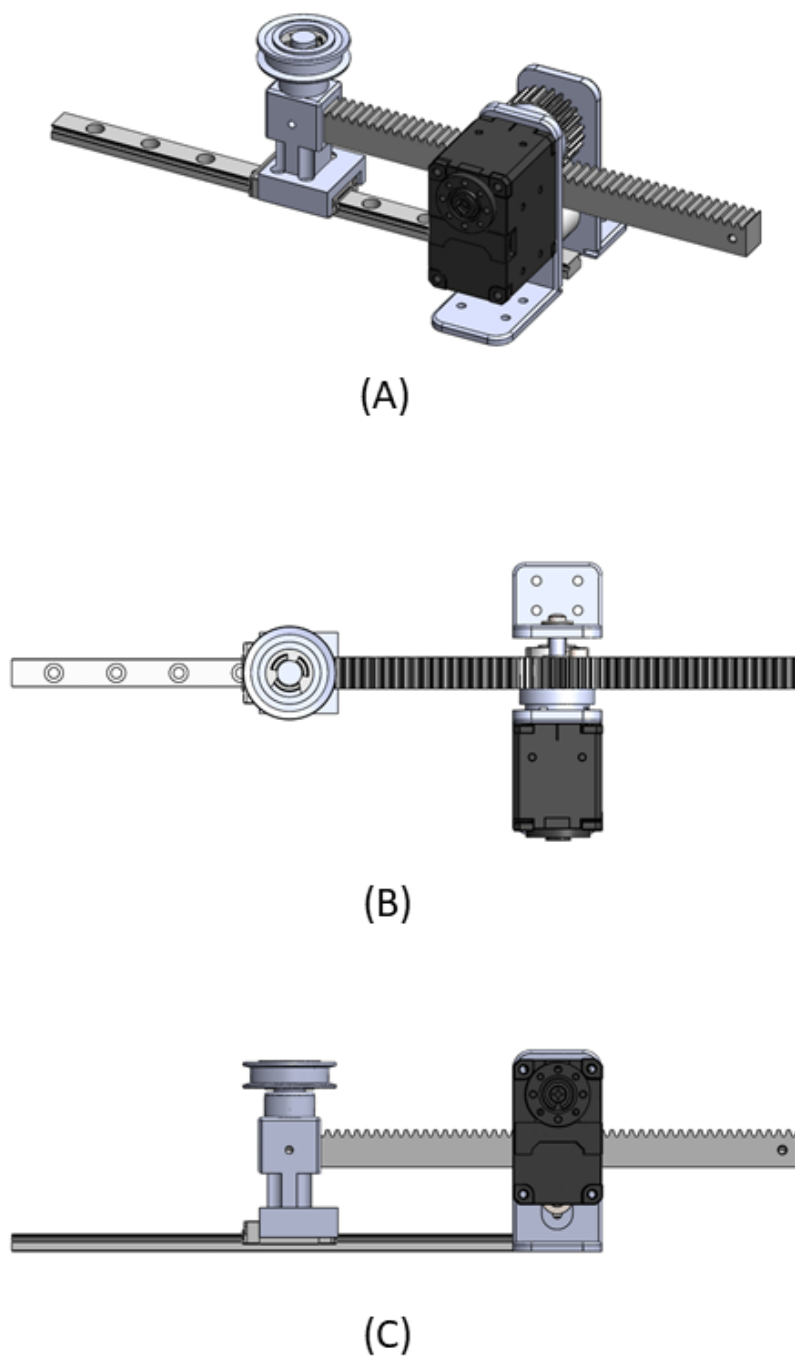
CAD of tensioning unit part with 1:2 scale;(A) the isometric view, (B) top view and (C) front view
